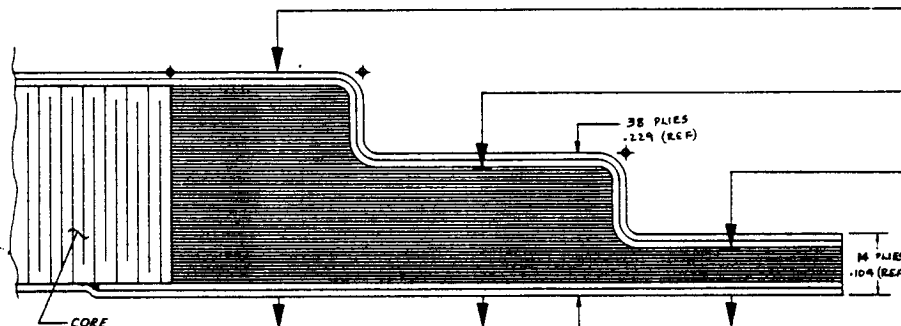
DRAWING AMC7840 - SKIN PANEL ASSEMBLY (SHEET 4 OF 4)
